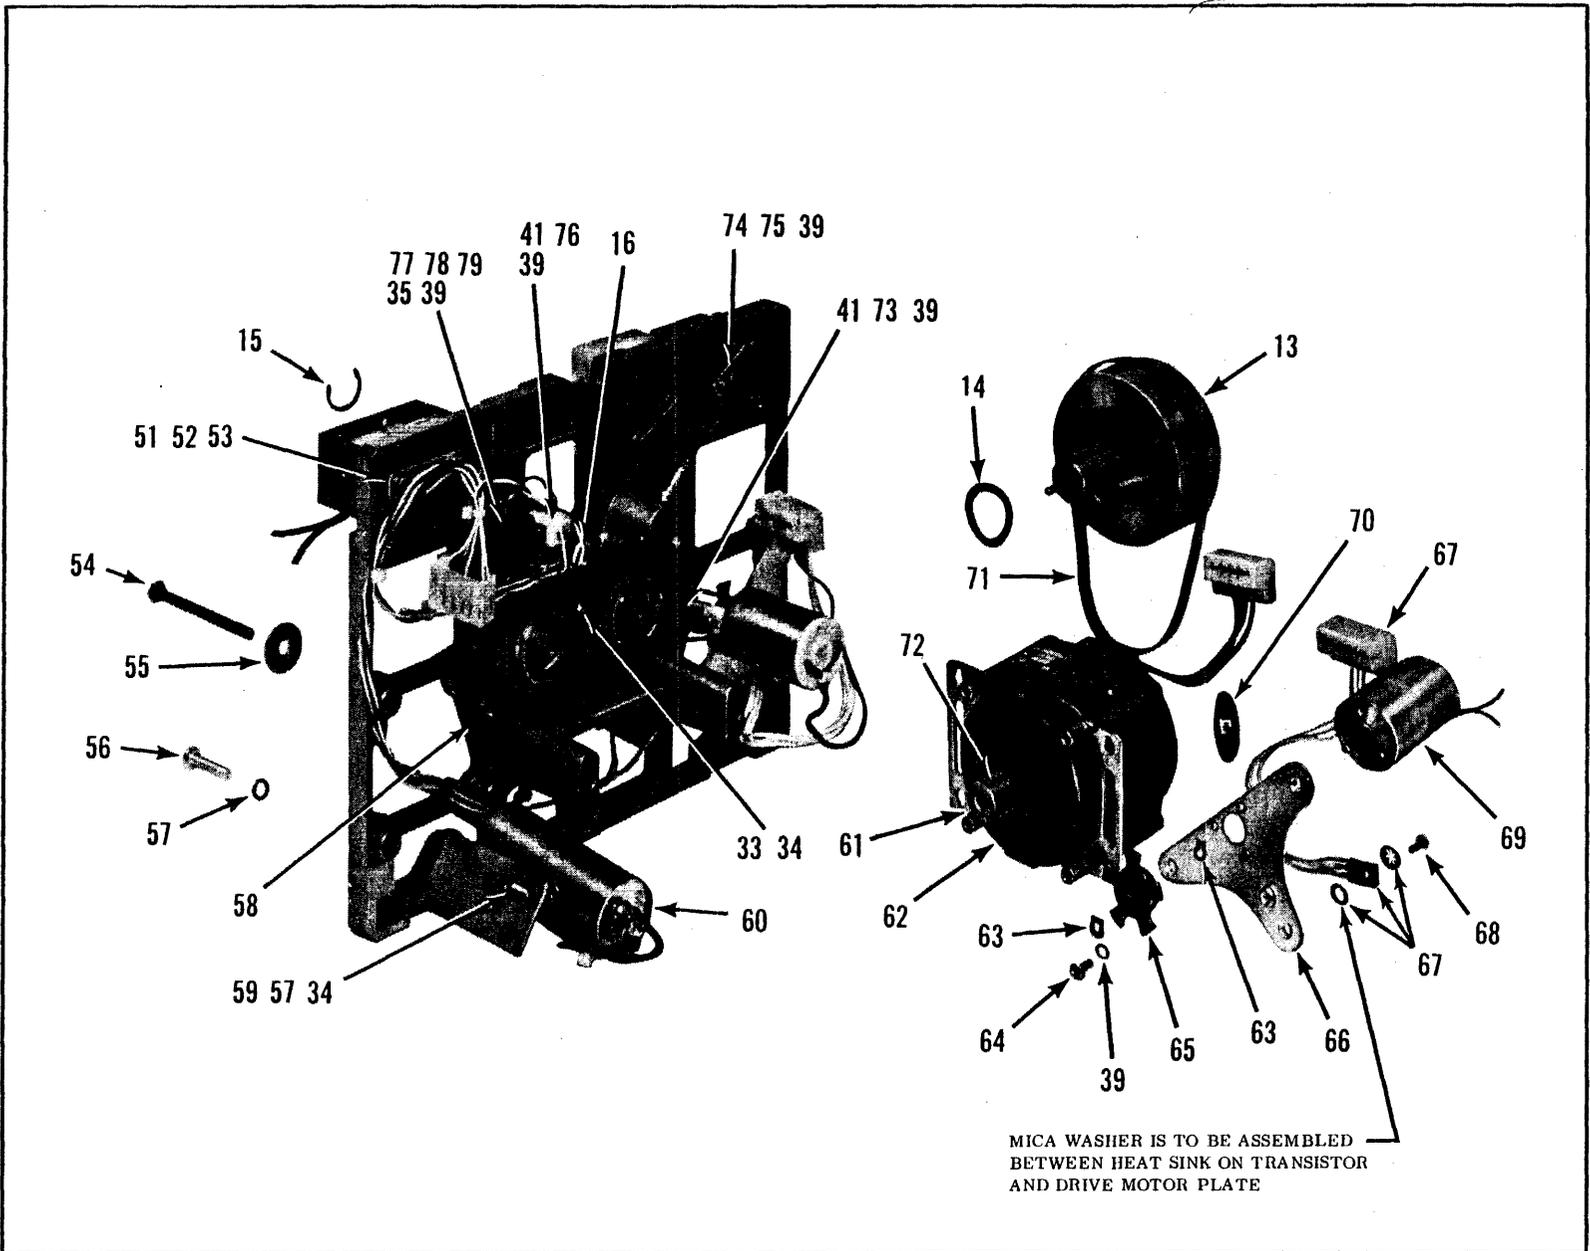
EXPLODED REAR VIEW OF TT120 TRANSPORT
